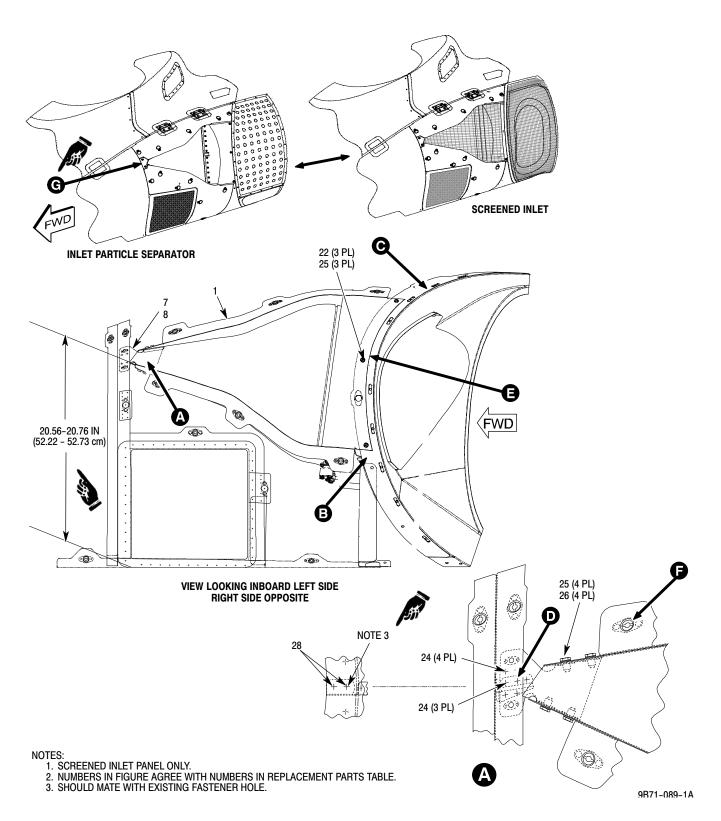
NACA Inlet Assembly Installation (Sheet 1 of 2)
